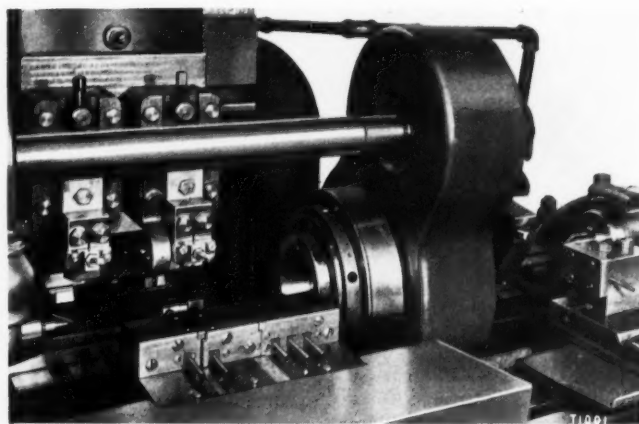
Close-up of center drive, overhead slide, and tooling for turning axle shafts.
